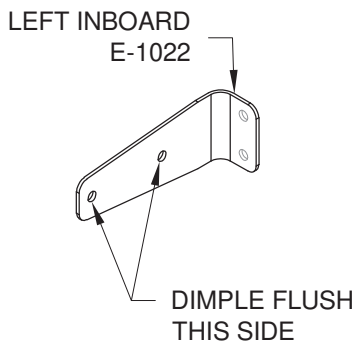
DIMPLE SKINS & MACHINE COUNTERSINK TRAILING EDGES
